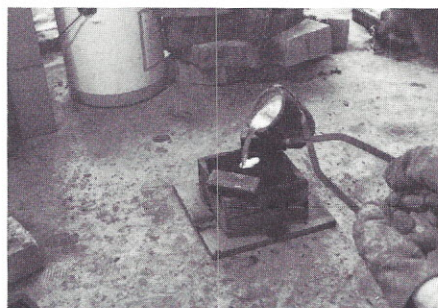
Pouring the metal into the finished mold. Note the weights on the cope.
